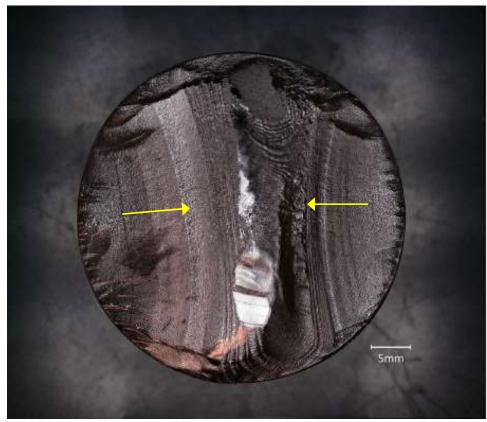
Close up of fracture surface showing fatigue cracking striations propagating in opposing directions. Arrows indicate crack propagation direction, [Lab report].
